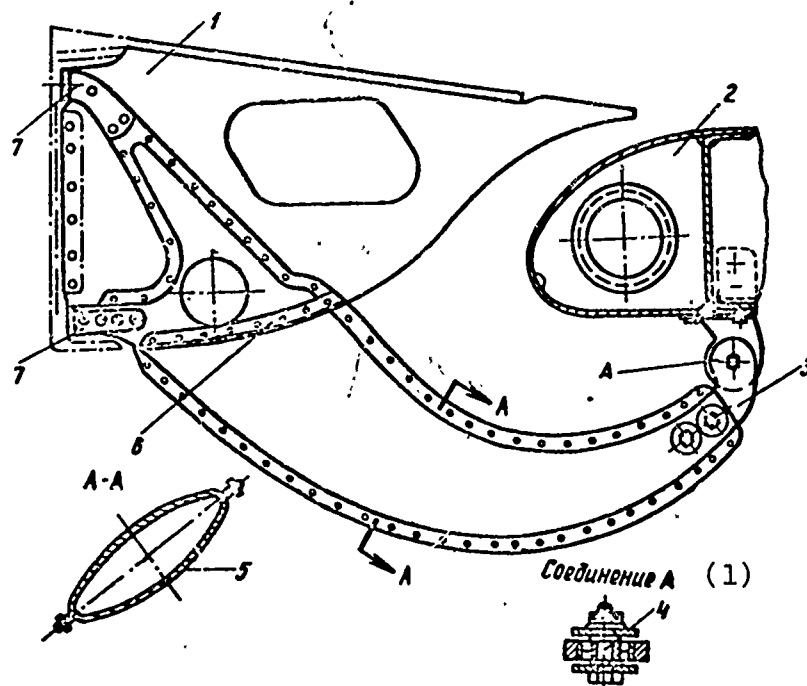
The attachment point of ailerons and flaps: 1 - trailing-edge rib; 2 - aileron (flap); 3 - fork; 4 - clamp bolt; 5 - jaw; 6 - angle; 7 - spar attachment angles.
